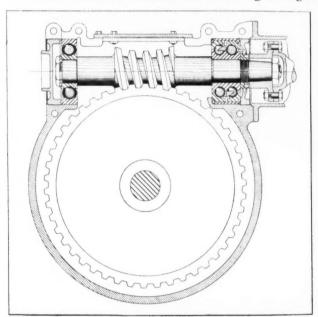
Simplified Design, with Double- and Single-row Ball Bearings
